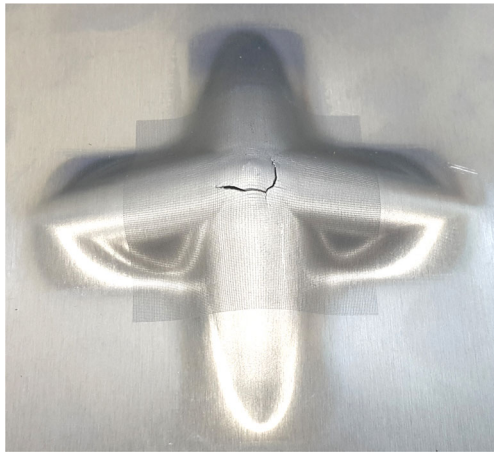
Fracture at the centre area of the four-wing star specimen (bottom view)
